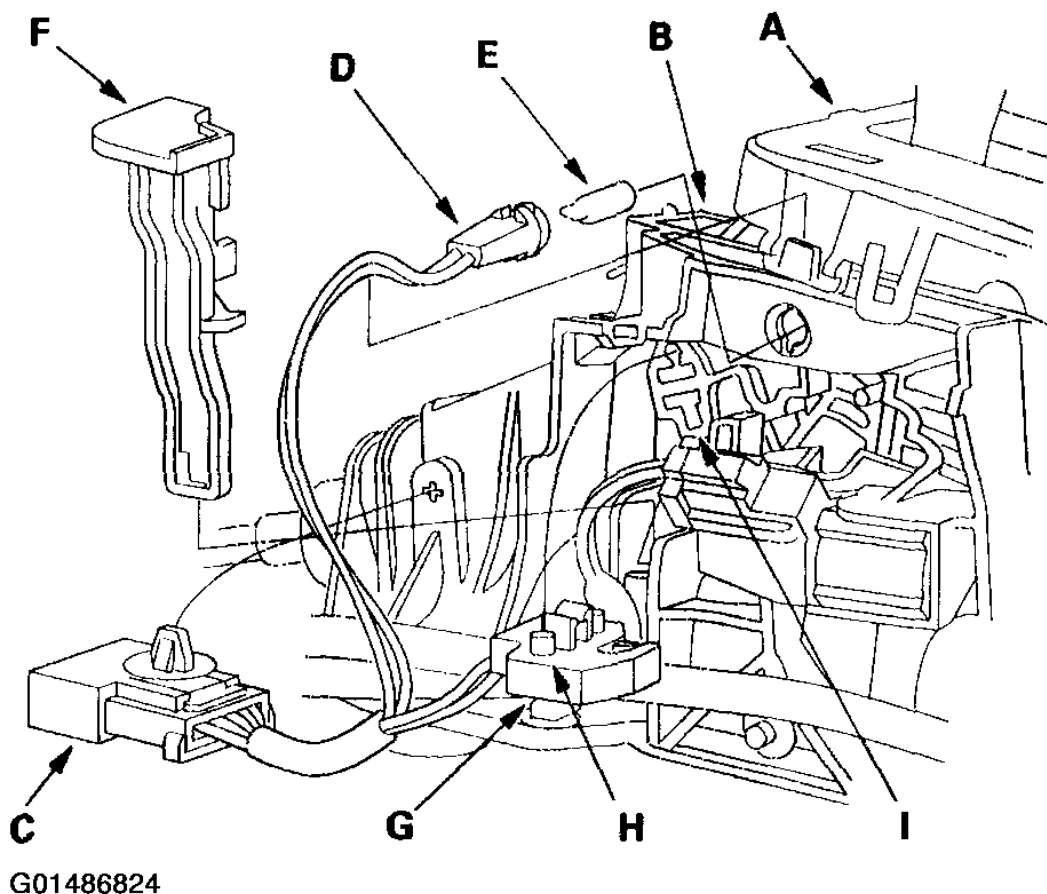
Removing A/T Gear Position Indicator Panel From Shift Lever Bracket Base
